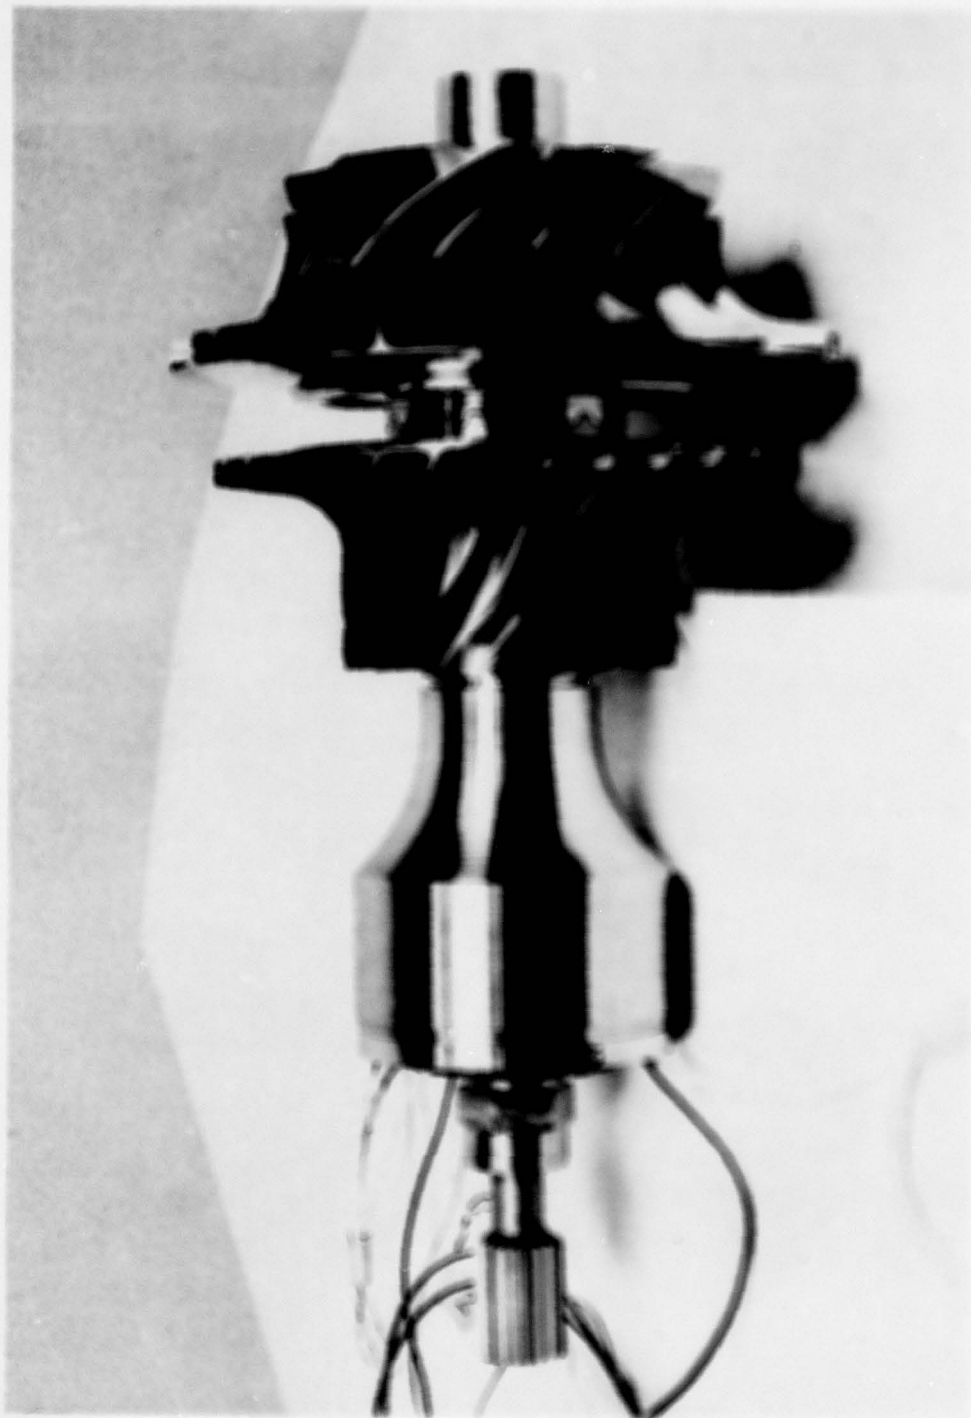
Turbine Motor, Test Rig Capsule, and Piston Assembly
